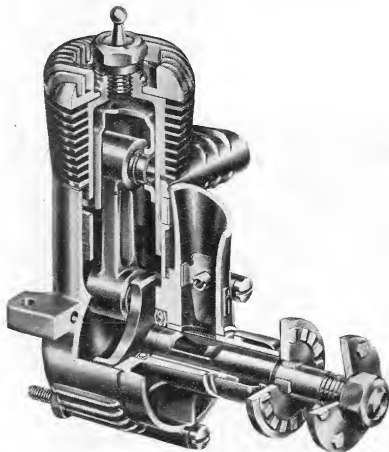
The well-known "Ohlsson and Rice 23" glow plug motor shown in section with robust connecting rod and crankshaft with rotary induction port. Ball races are fitted.
